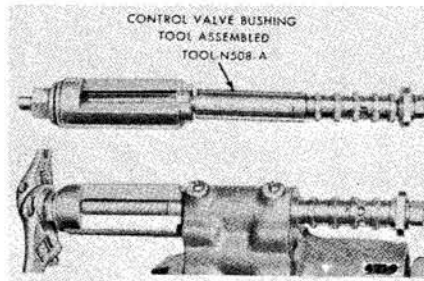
Threaded rod type push puller designed by Ford, for removing and installing valve bushings.
